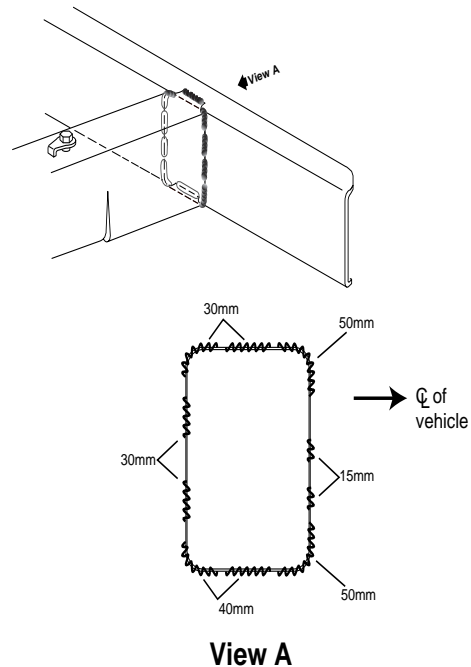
Weld Perimeter of Joint, as Indicated
